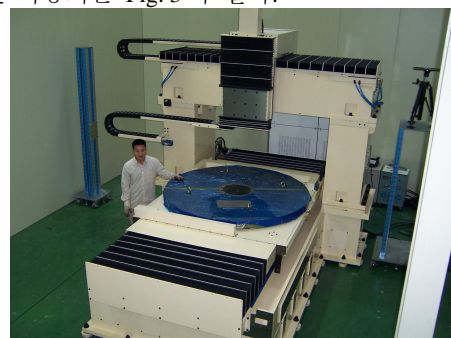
A complex fabrication system before loading the workpiece and the grinding head
